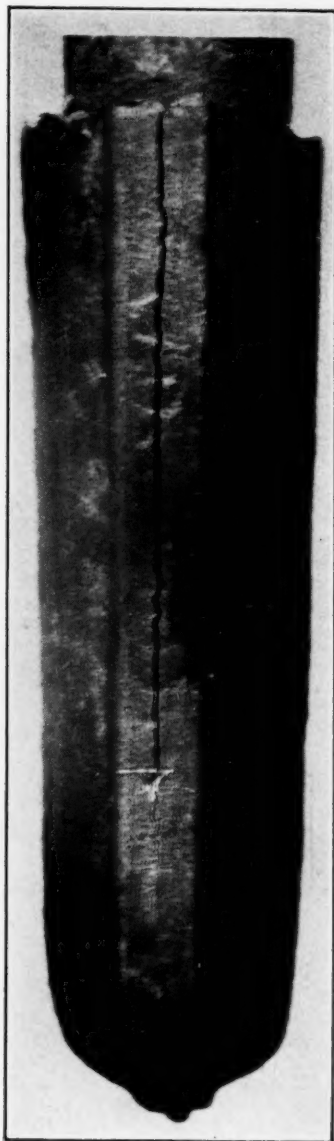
INGOT OF S.A.E. 3245 STEEL SHOWING LONGITUDINAL CRACK.
